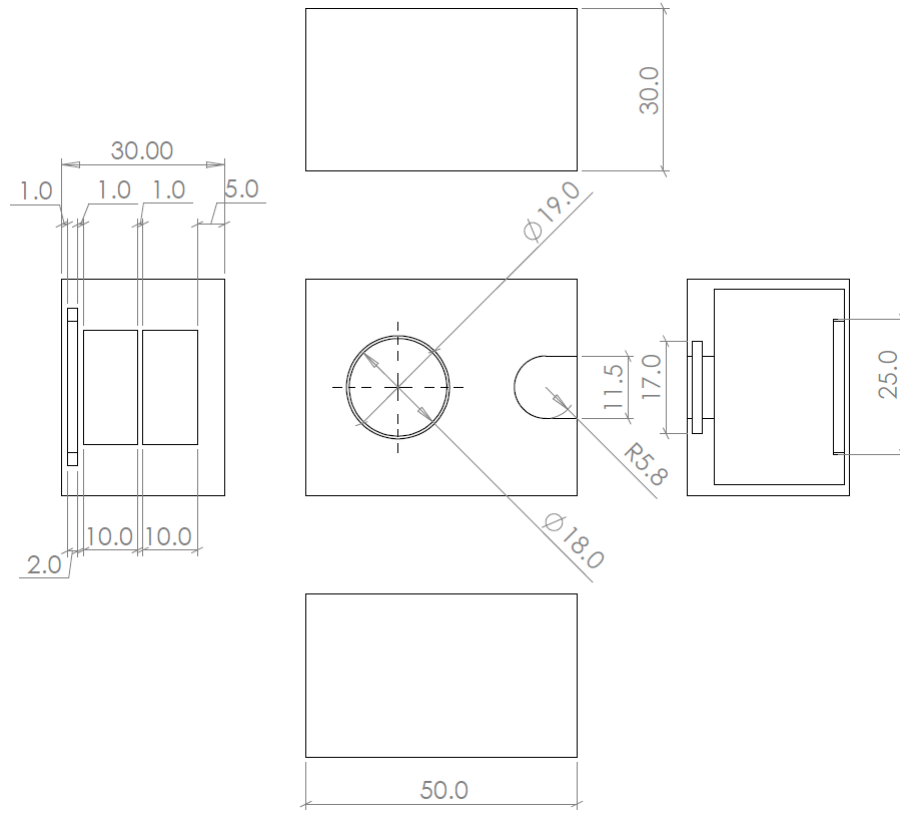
3D holder dimensions. Dimensions in views are presented in millimeters.
